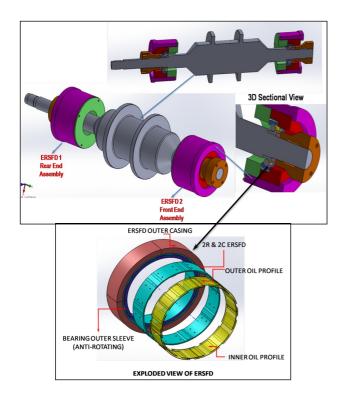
3D Model of Test Rig Engine Rotor System with an Exploded Dual ERSFD.
